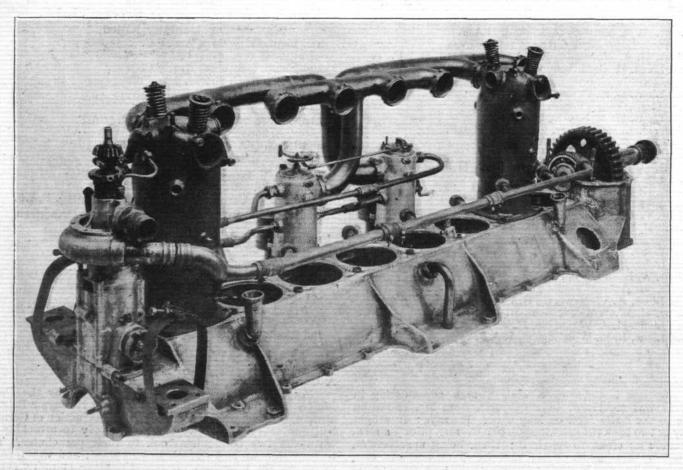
The 240 h.p. 8-cylinder Mercedes. Top half of crank-chamber, showing carburettors and induction pipes, and arrangement of water piping, &c.
